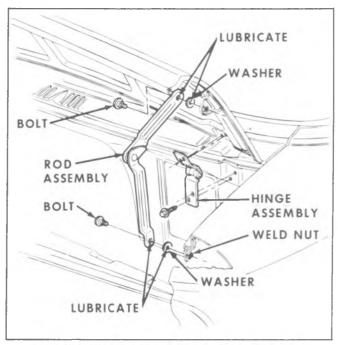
C-5-Hood Hinge and Rod Assembly-G Series
